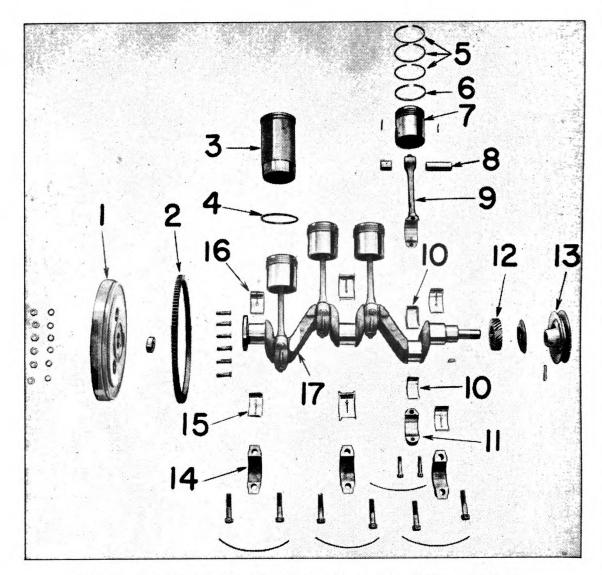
Detail of Engine Crankshaft, Connecting Rods and Pistons
